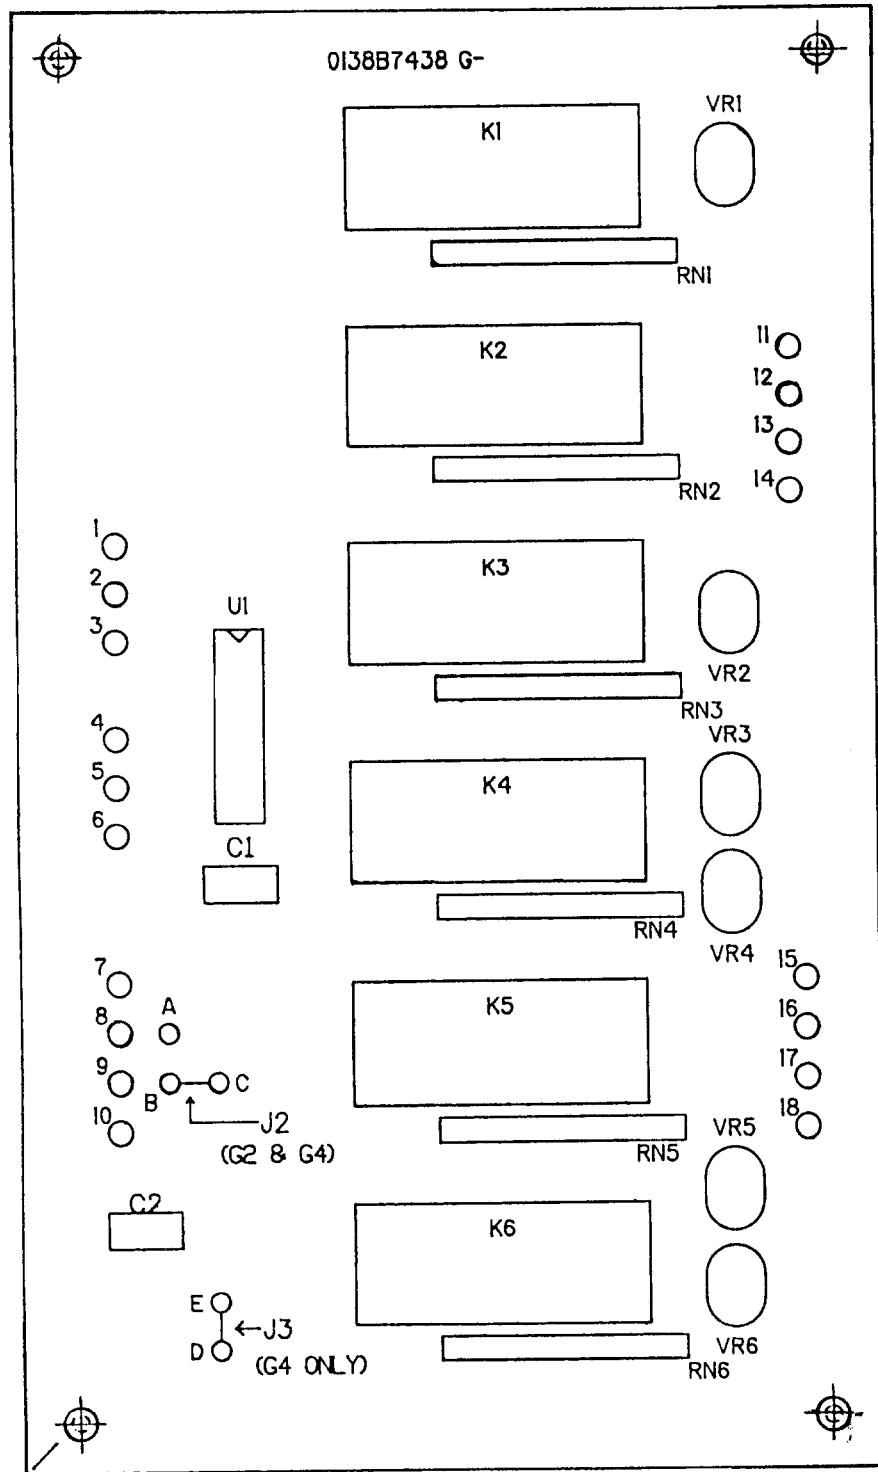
P18H-HP4 (FLOW SOLDER)
